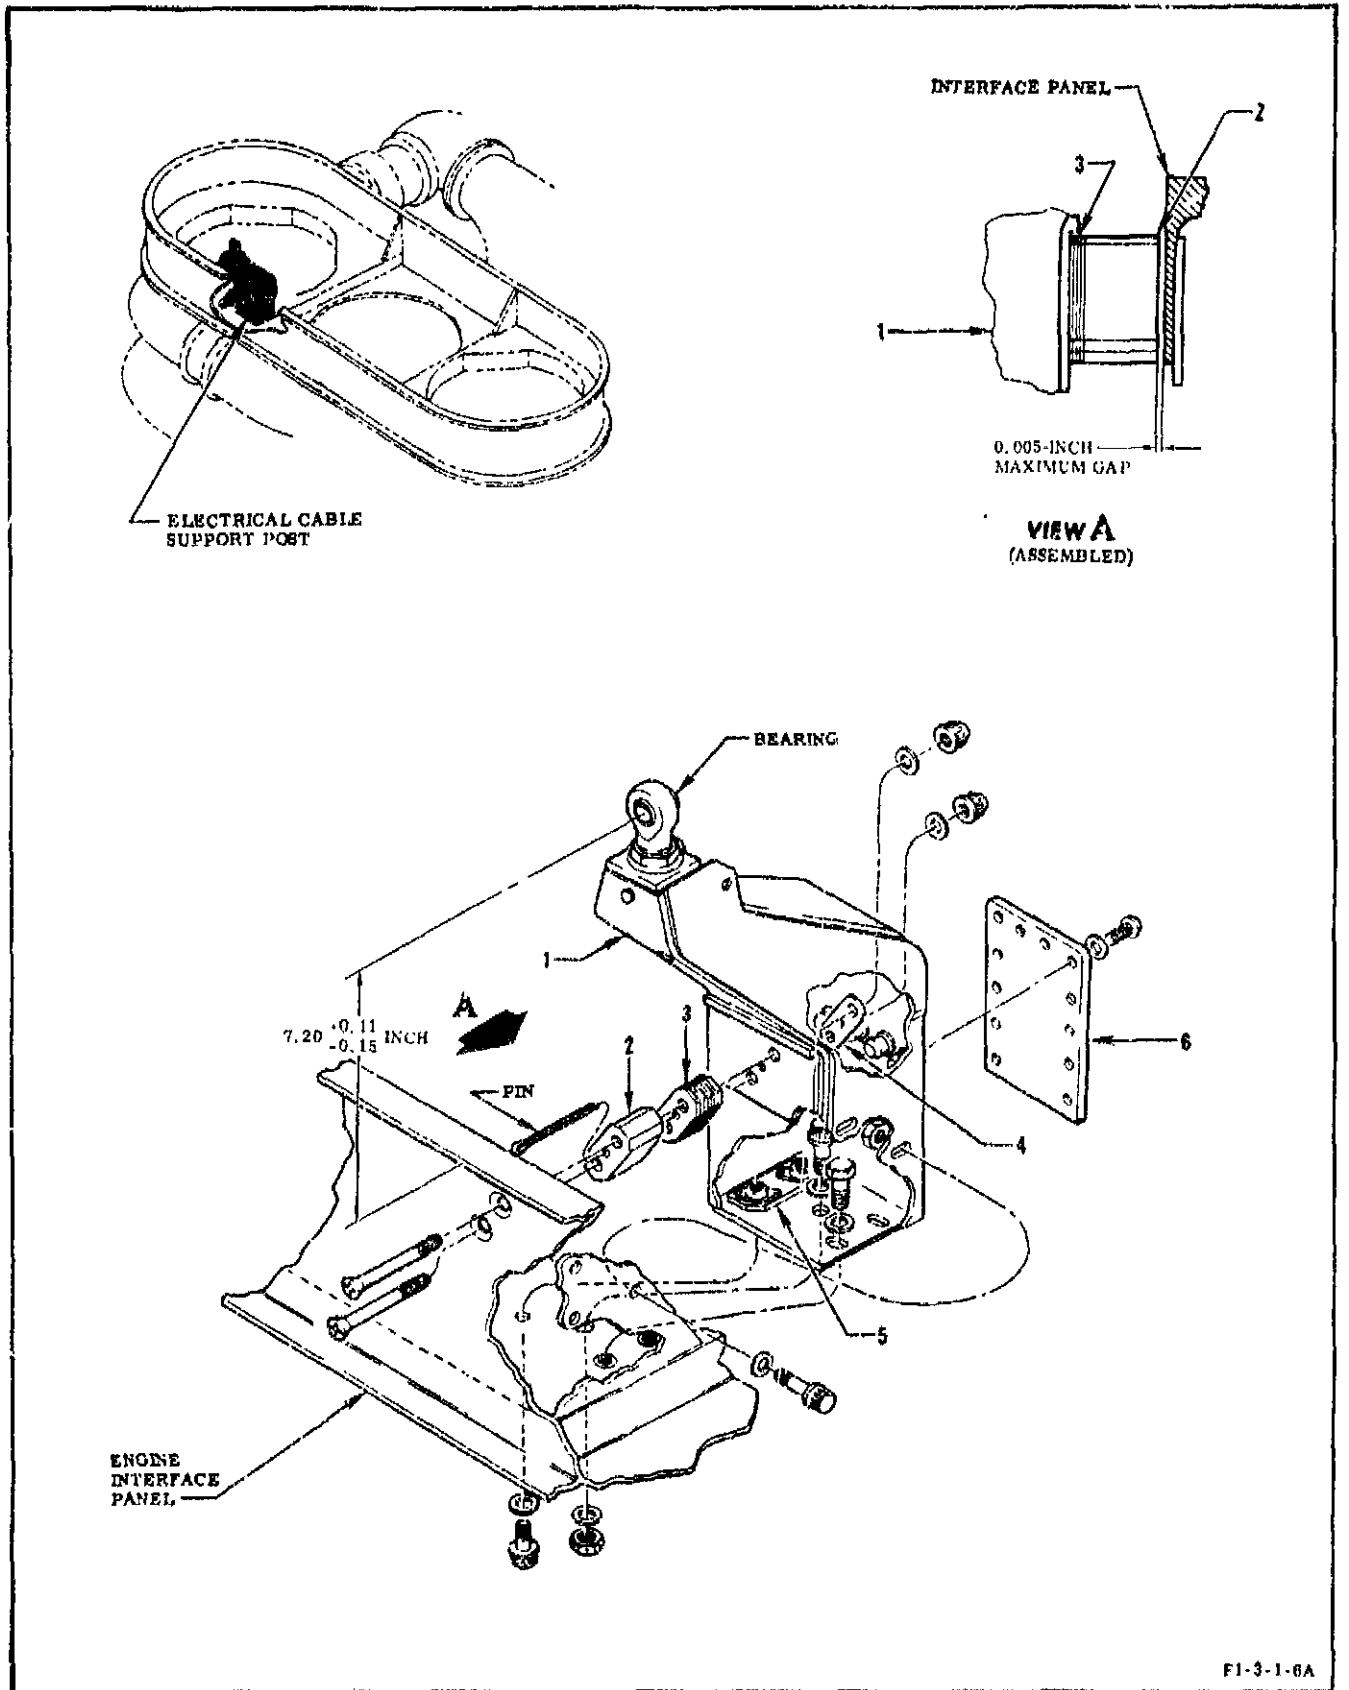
Electrical Cable Support Post (Sheet 1 of 2)
